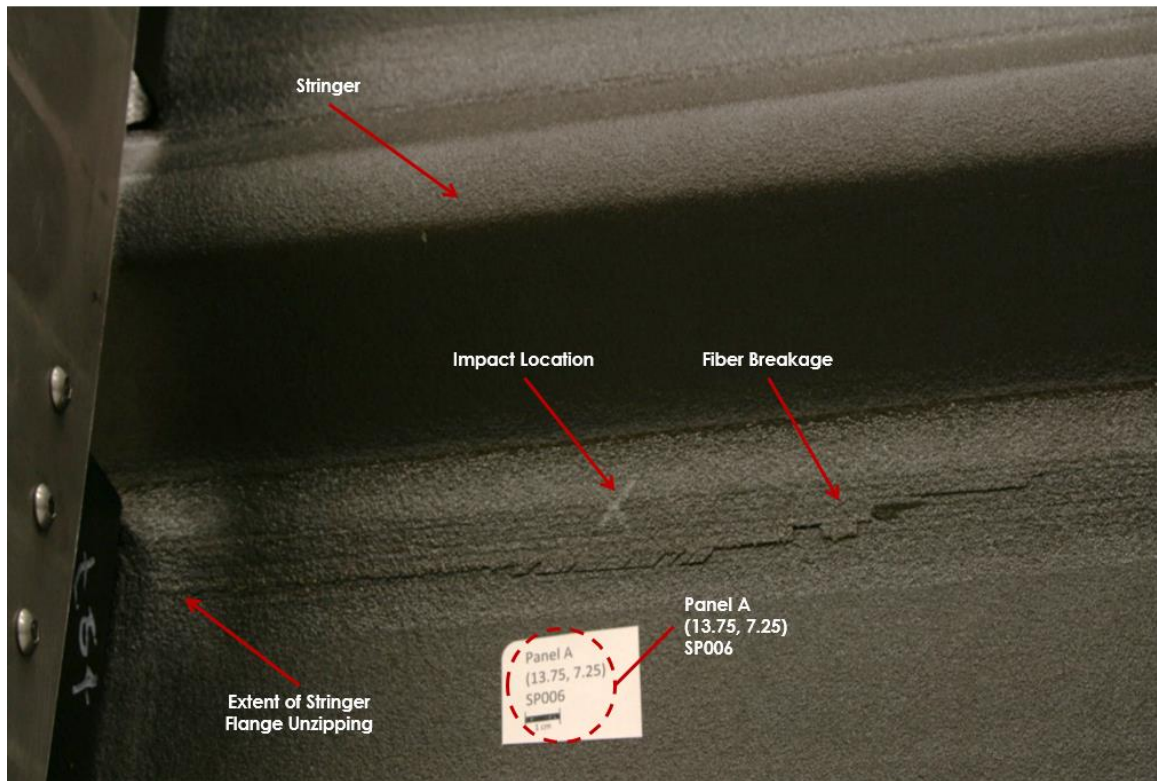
Back Side Damage Caused by 420.7 J (89.6 m/s) Middle of the Flange Impact (Type IIb).
